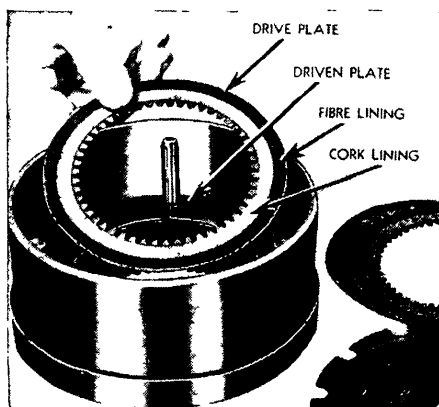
To assemble rear unit, start with a composition clutch plate and finish with a steel plate. Driven (steel) plates are assembled with square notches over drive pins. Apply Hydra-Matic fluid to each plate as assembled
